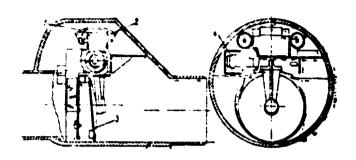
Pocking feed valve for a sodium pipeline, dy 2 203 mm.
